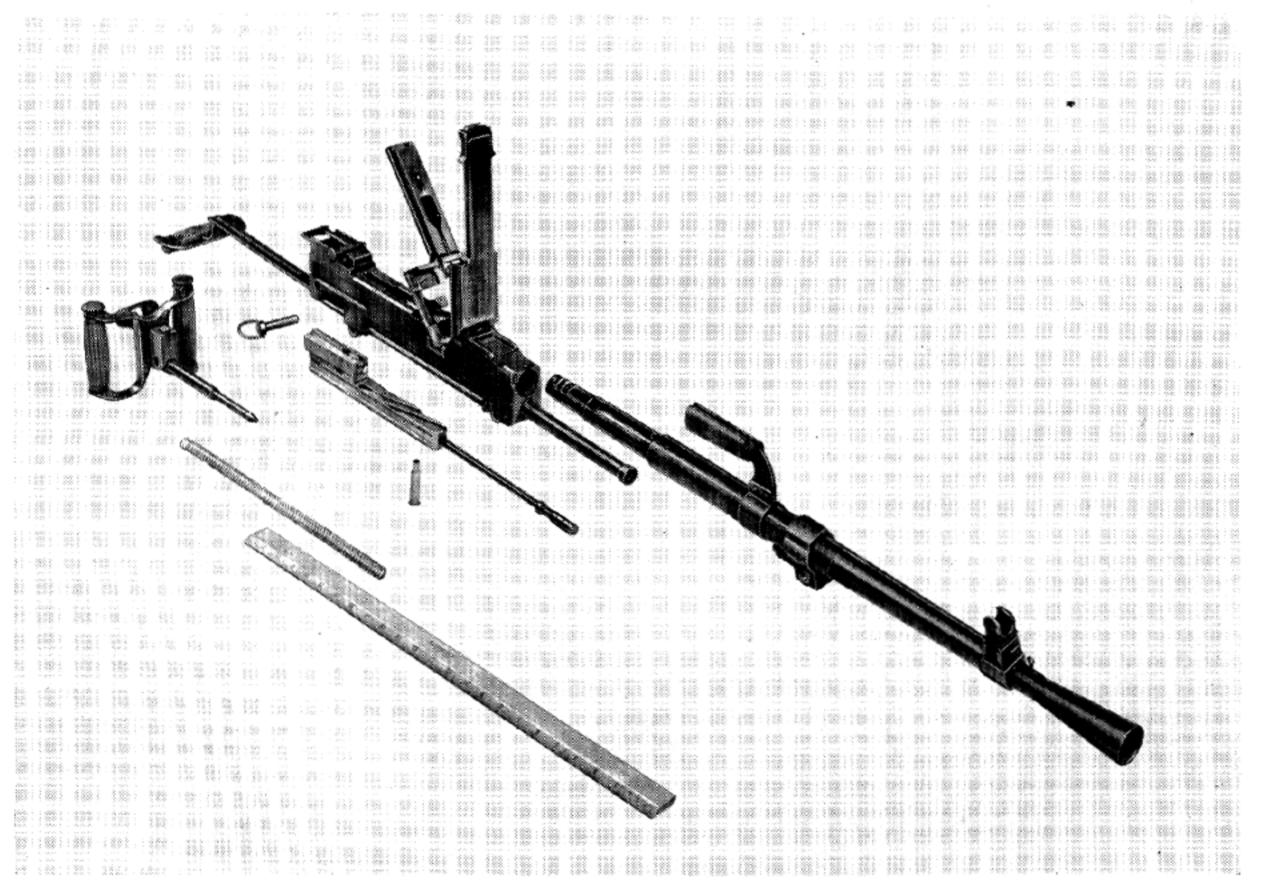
Stripping the SG-43, continued. The bolt and the operating slide, with piston attached, have been removed.
